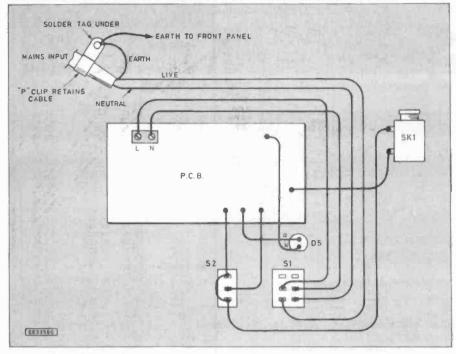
Interwiring, the front and rear aluminium panels must be earthed.
